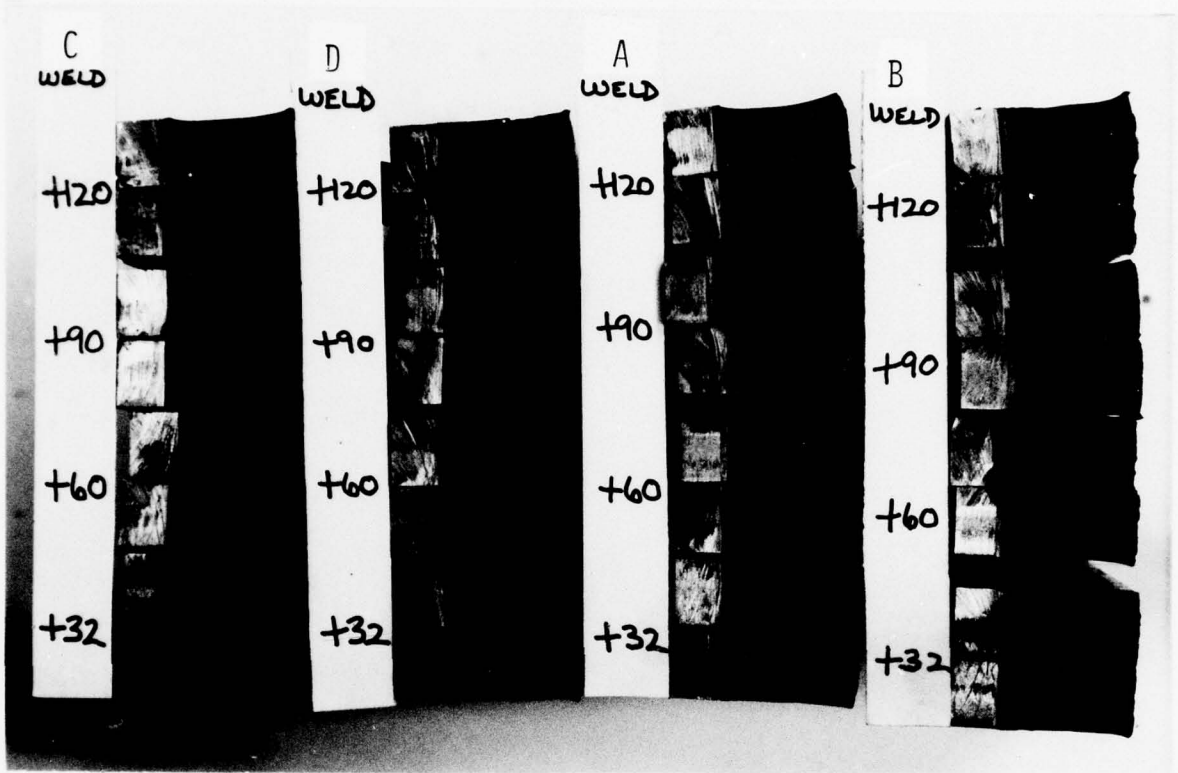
DYNAMIC TEAR FRACTURE SURFACES OF FLASH-WELDED SPECIMENS
